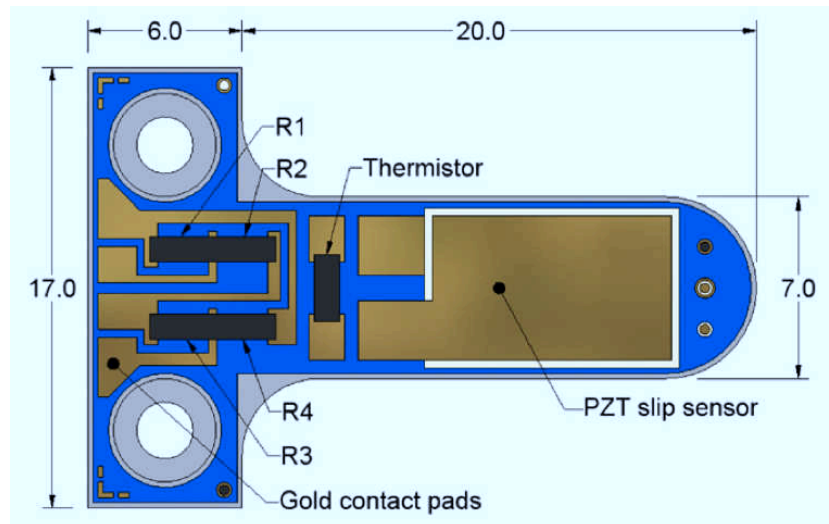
Dimensions of the fingertip cantilever (mm) and the location of sensors [54].
